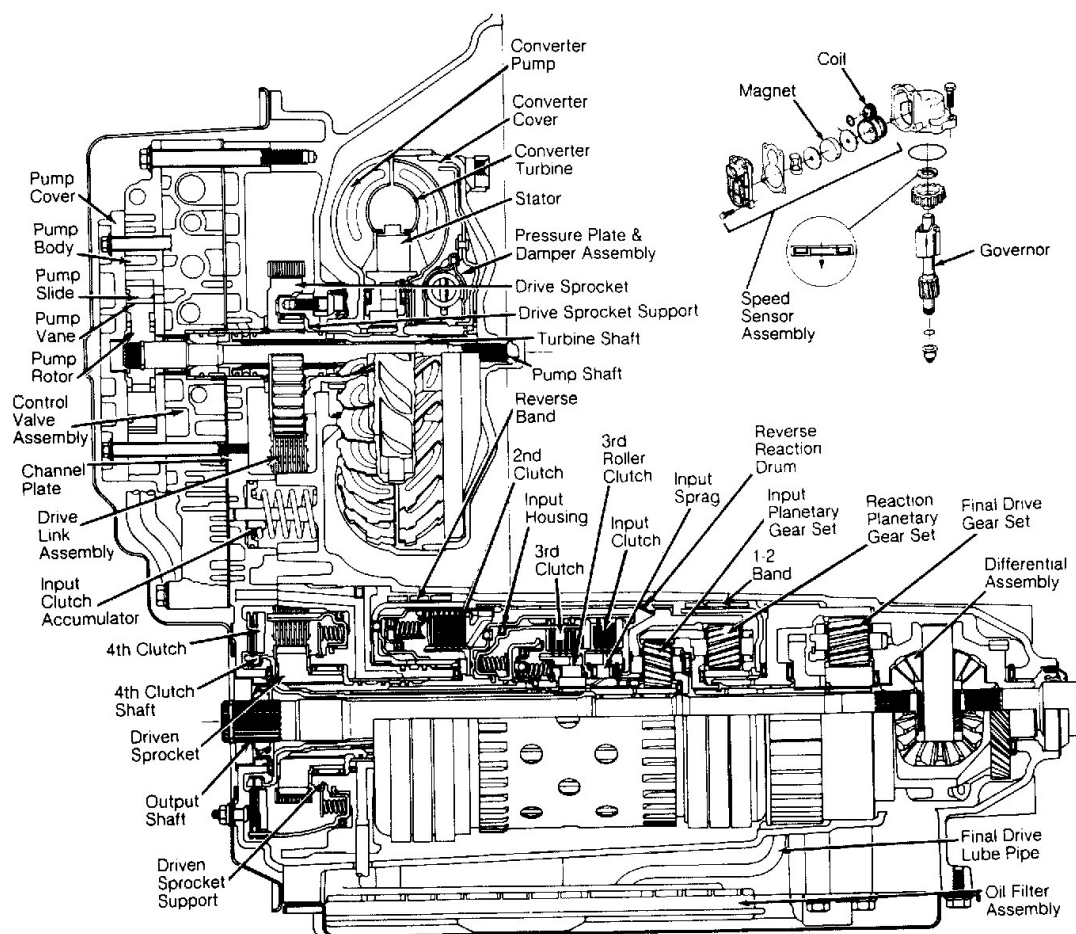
Identifying Hydra-Matic 4T60 Transaxle Components
